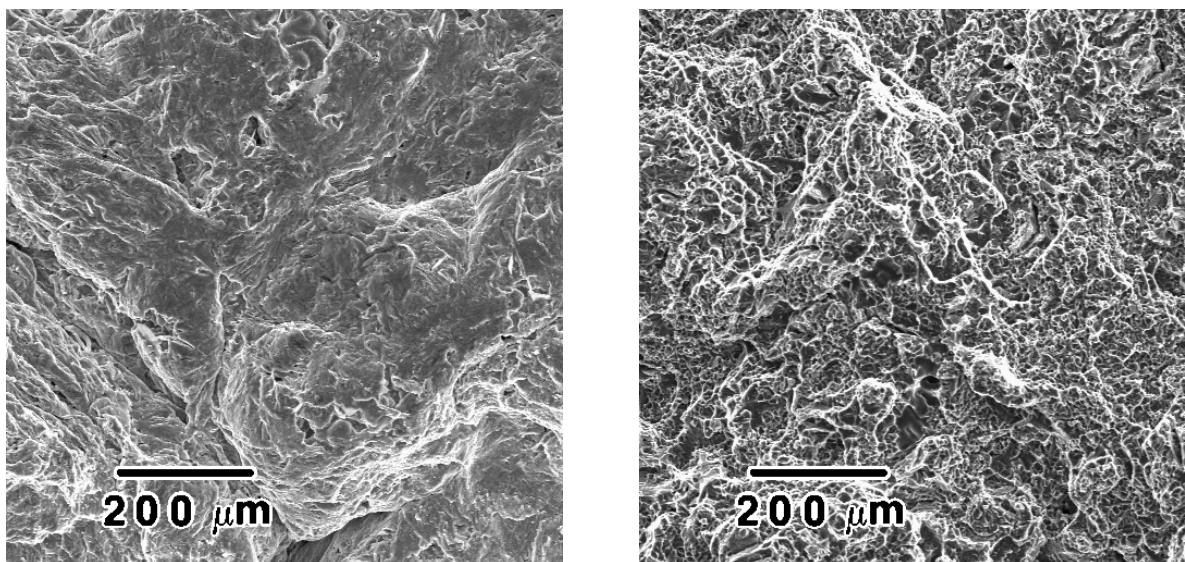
SEMs of a Defect in the Fracture Surface (left side) and of the Clean Fracture Surface (right side)
